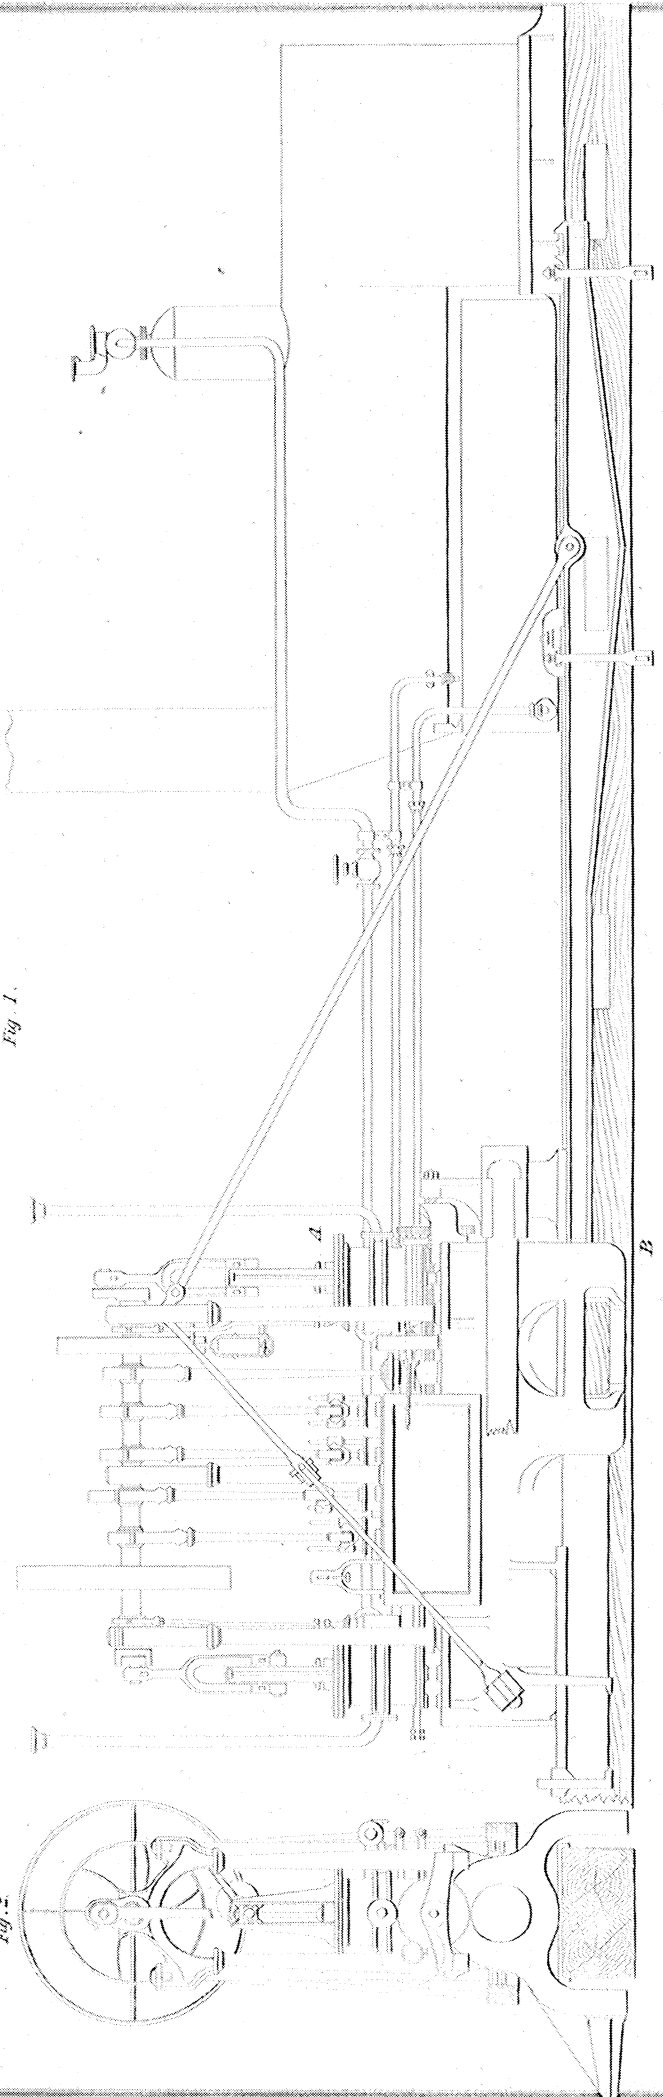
FIGURE TWO, is an end view of the hydraulic cylinder and engines, on the plane A B.
